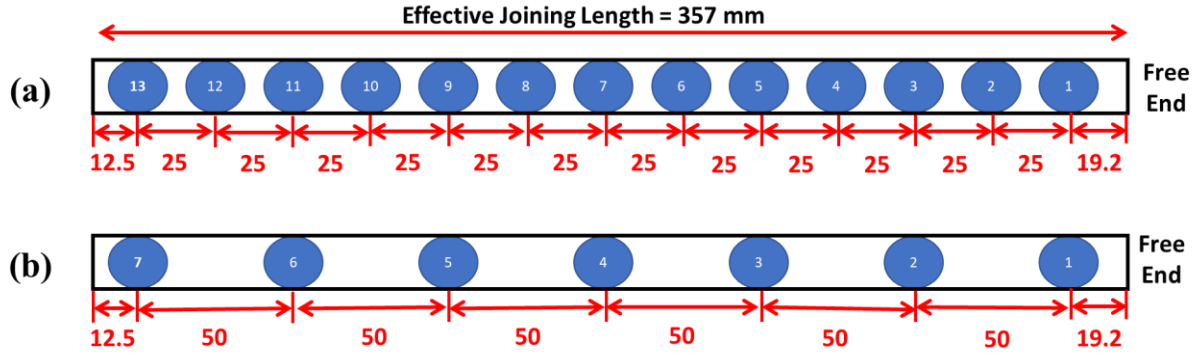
SPR rivet configurations along the effective joining length using (a) 25 mm rivet spacing and (b) 50 mm rivet spacing.
